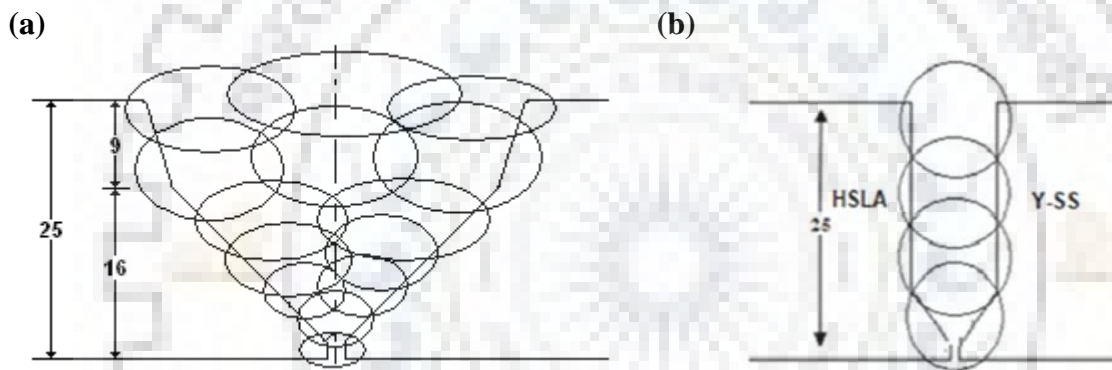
Schematic diagram of (a) multi pass multi seam per layer deposition and (b) multi pass single seam per layer deposition technique.
